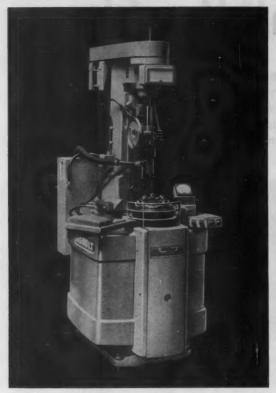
Gisholt vertical balancing machine measures amount and location of static unbalance
